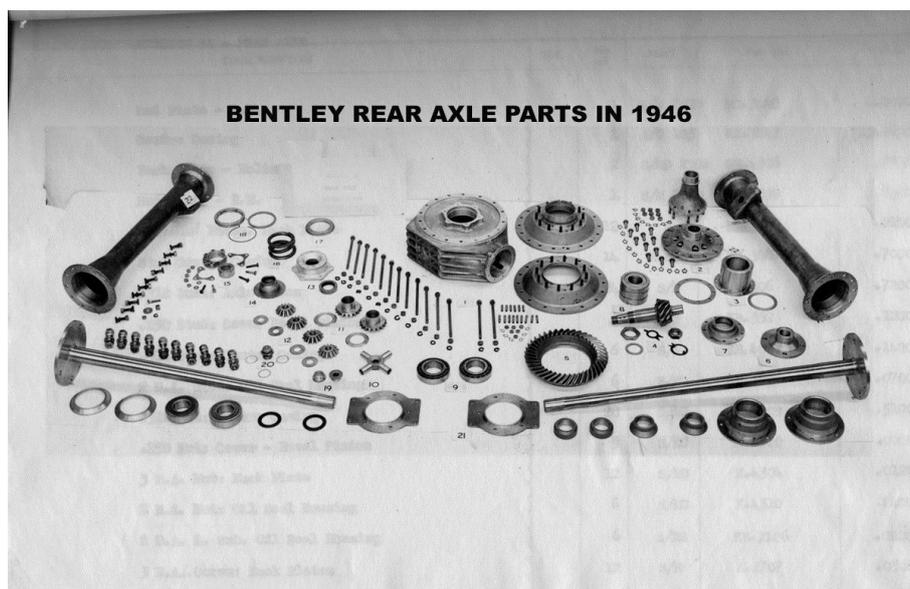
All the parts necessary to assemble a complete Bentley axle in December 1946. Many of the parts were modified for later axles.
